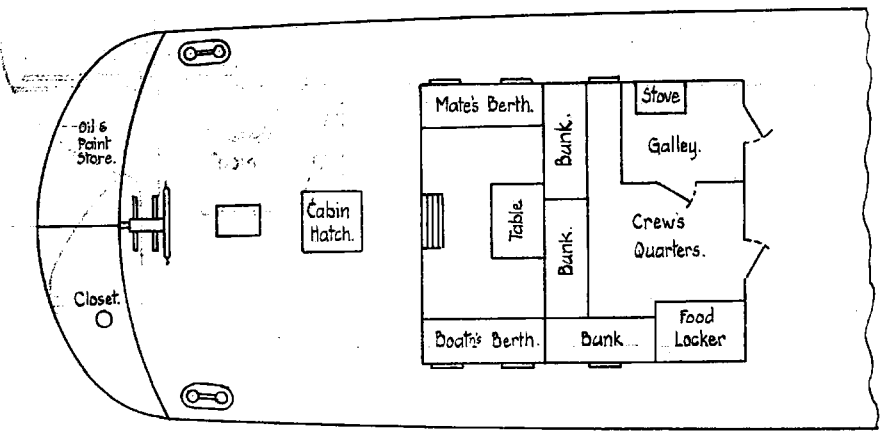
PLAN OF DECKHOUSE ON A GERMAN SCHOONER (WOOD)
